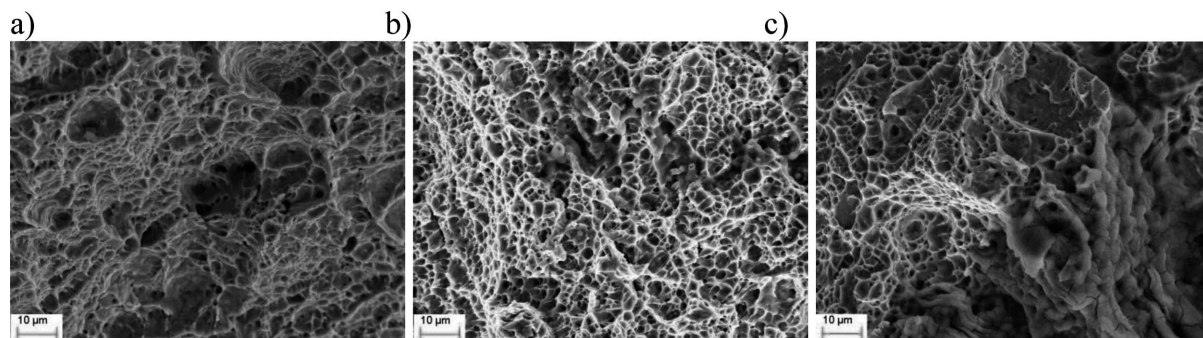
Appearance of the fracture of Charpy specimens: a) BM; b) joint welded at the heat input of 120 J/mm; c) joint welded at 60 J/mm. SEM (magnification 2500x)
